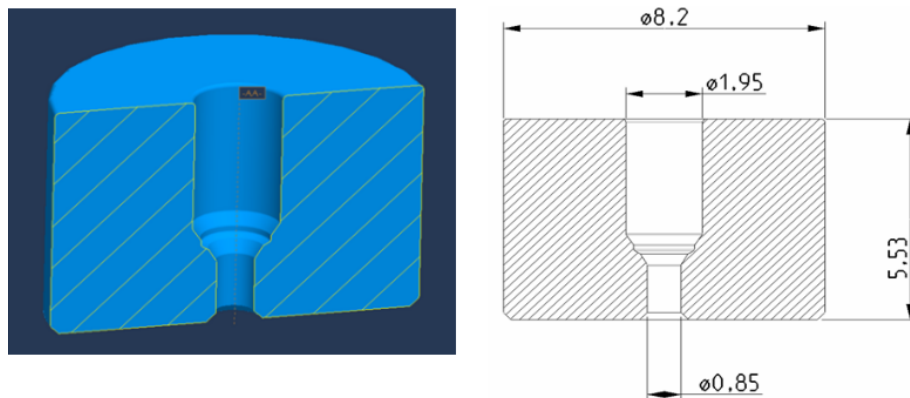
Die geometry to be manufactured. The die is a pre-forming die for a two step forming process for manufacturing of a micro axle for a potentiometer.
